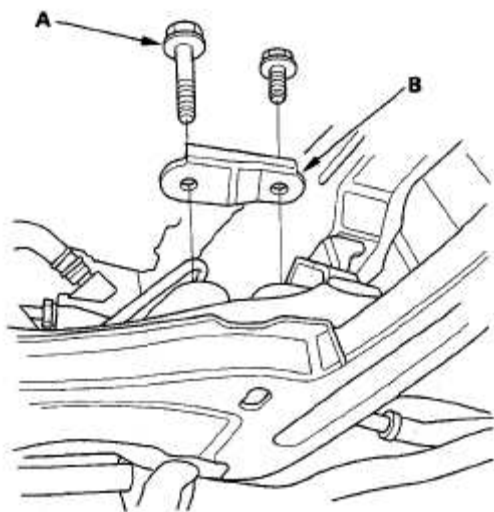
Identifying Steering Gearbox Mounting Bolt
